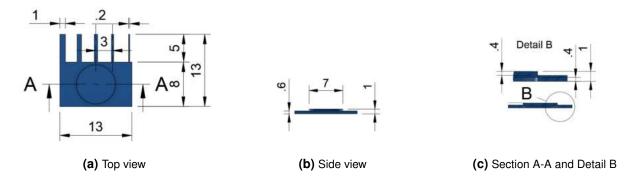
Technical Drawing of Test-Object with Measurements in [mm] Made Using Fusion 360 [11]
